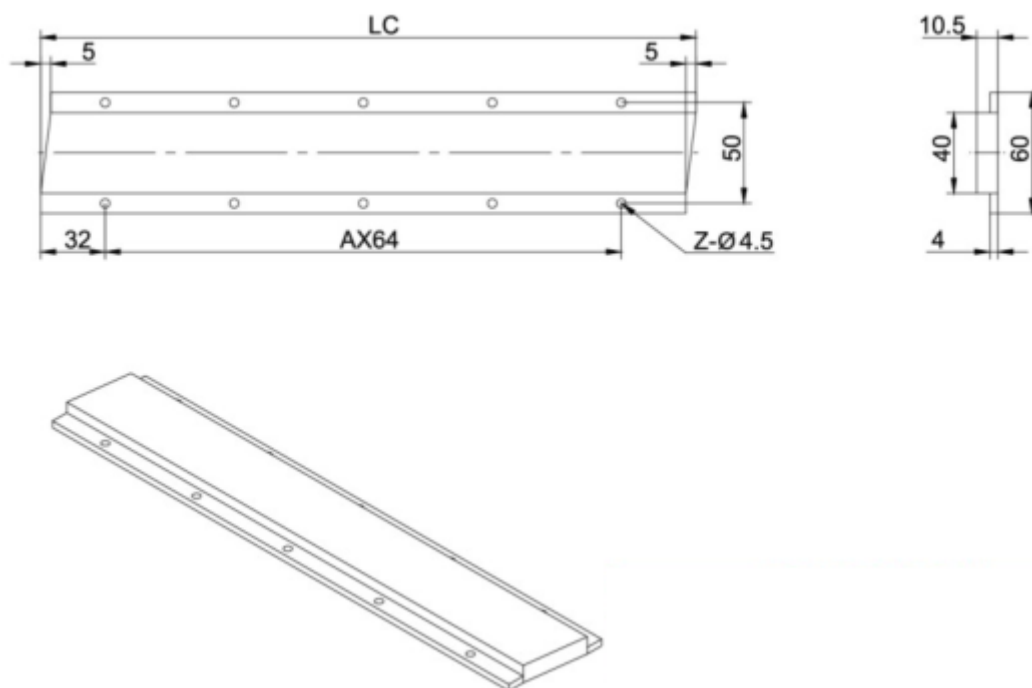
Dimensional drawing of WZCR-Z60 series stator
